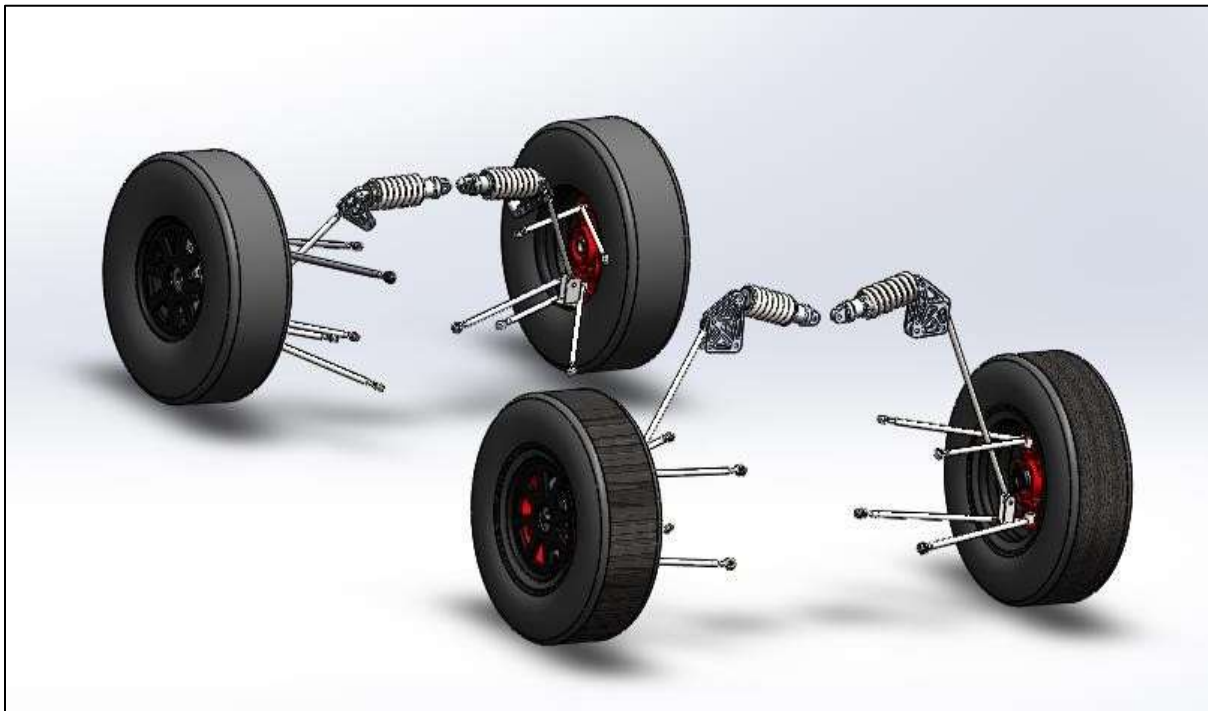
Finalized Suspension Geometry CAD of HR19
